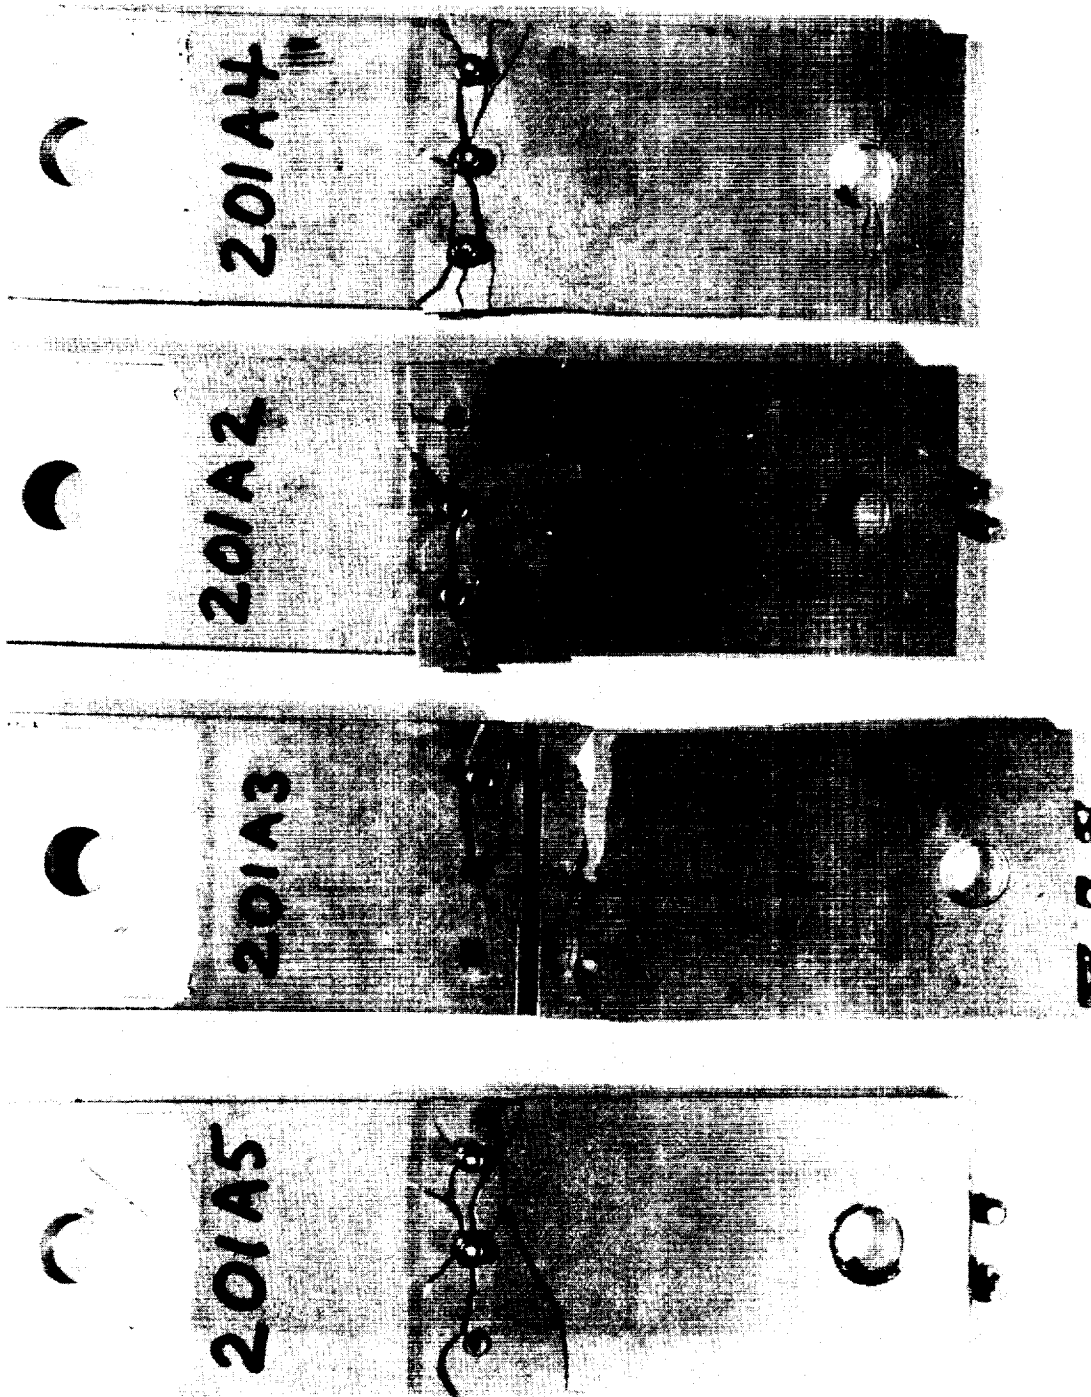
TYPE IA SPECIMENS - TYPICAL FAILURE MODE
